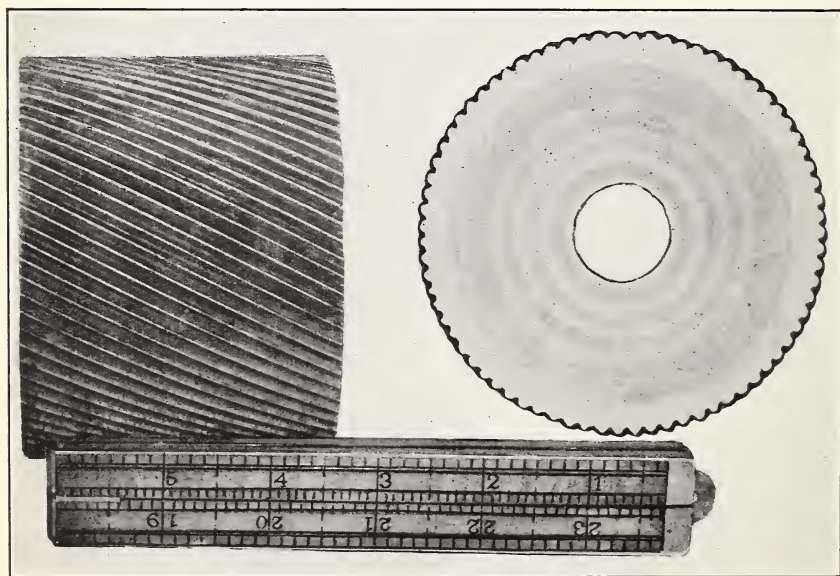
SPIRAL-CUT BURR, SIX TO THE INCH.
